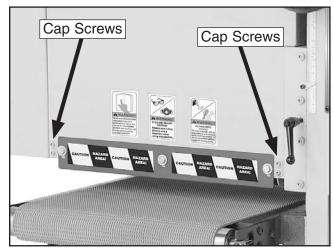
Pressure roller cap screws (front pressure roller cap screws shown)
